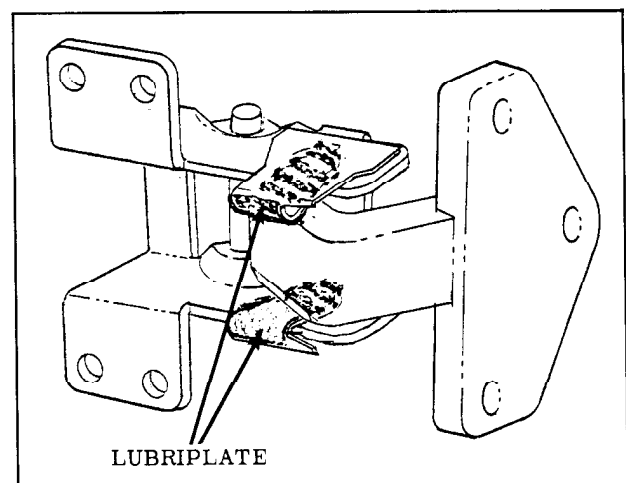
Front Door Hinge and Hold Open Assembly
